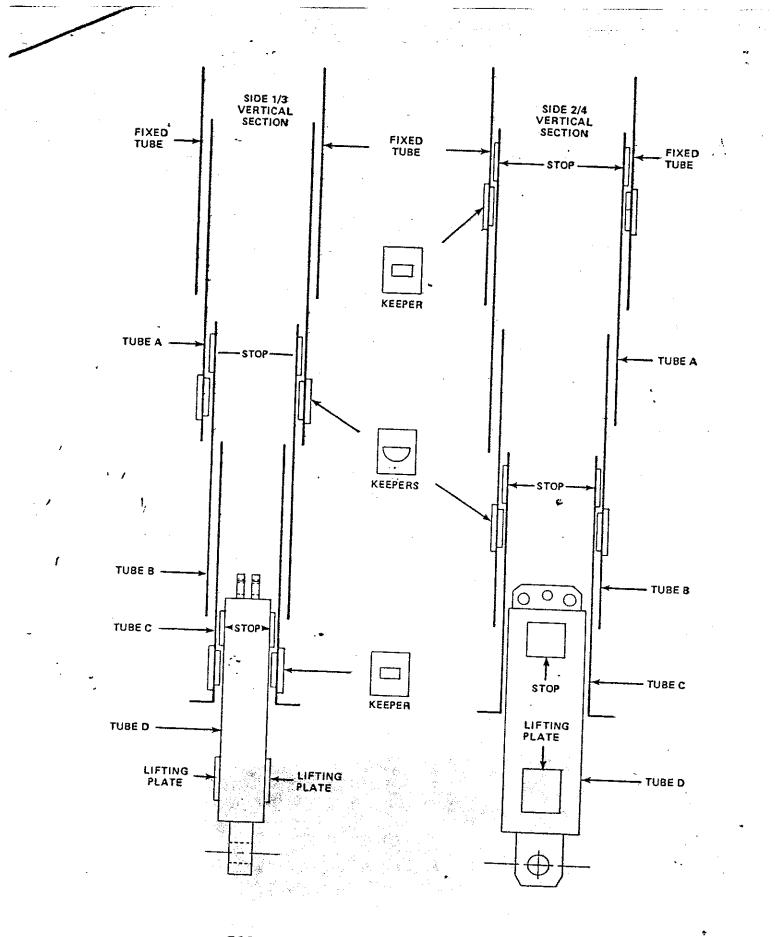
TUBE ASSEMBLY SECTIONS
